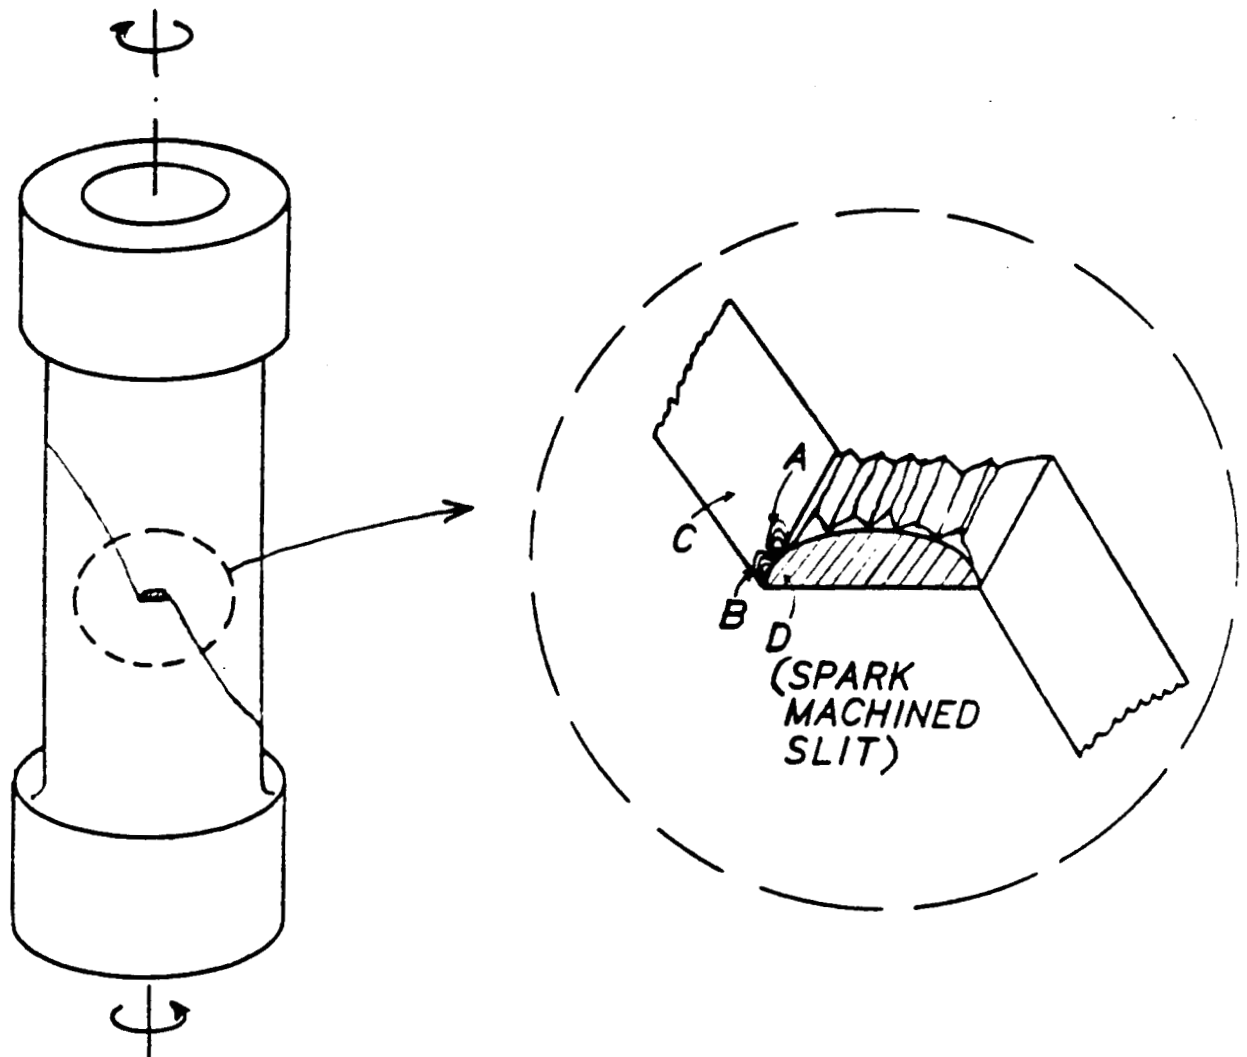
Schematic view of prenotched torsion specimen just after the specimen fractured. Fractographs of regions A, B, C and D identified here are presented in Figures 18 through 21.
